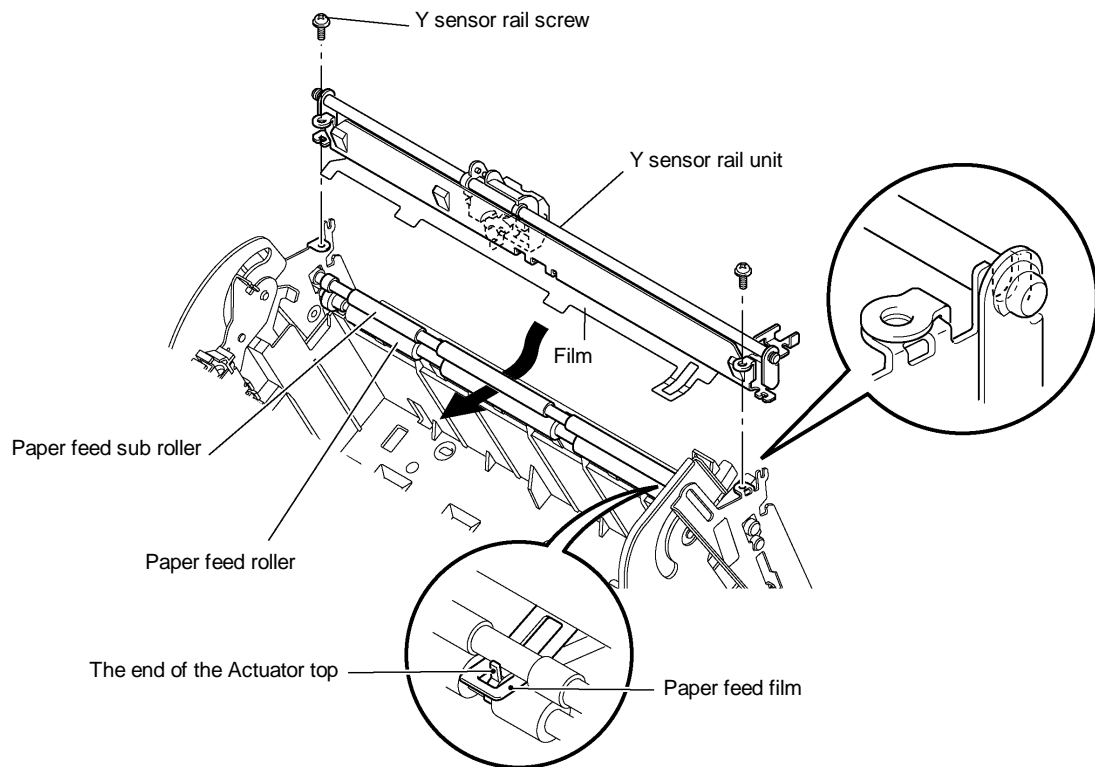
Assembling the Y-sensor Rail Unit
